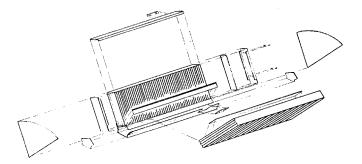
Exploded view of double V-bank retrofit design. (Source: Peerless.)
